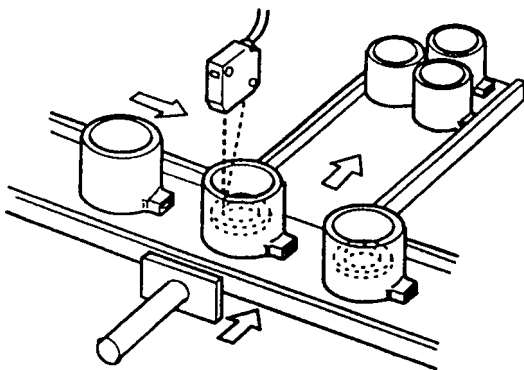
Detection of missing or doubled packing ring in cap.
